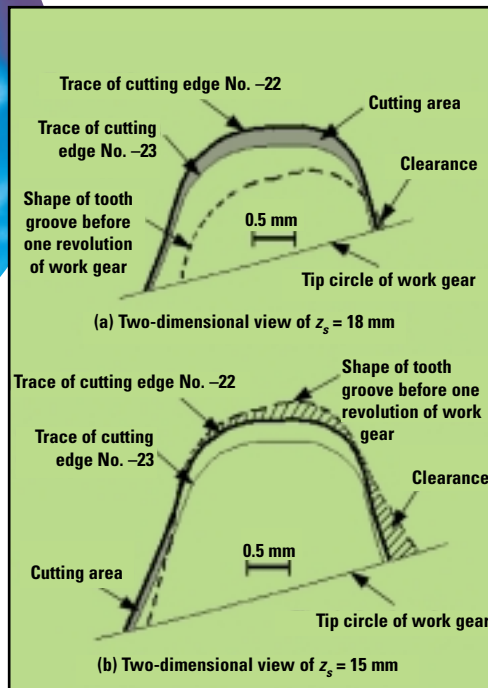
Expression of cutting area and clearance between work gear and the cutting edge of hob tooth No. -22.
